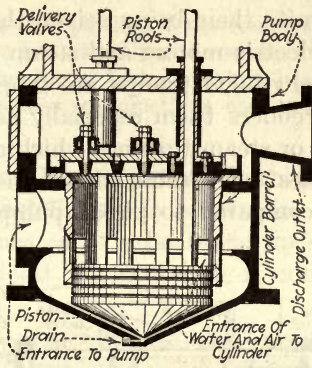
Sectional View Of Wheeler-Edwards Combined Condensate And Air Pump.
